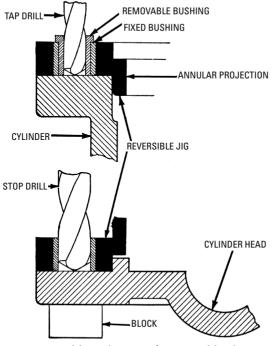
Note the use of a reversible clamp jig for the tap drill operation (top), and reversing the jig to drill the hole for the stud in the cylinder head (bottom).
